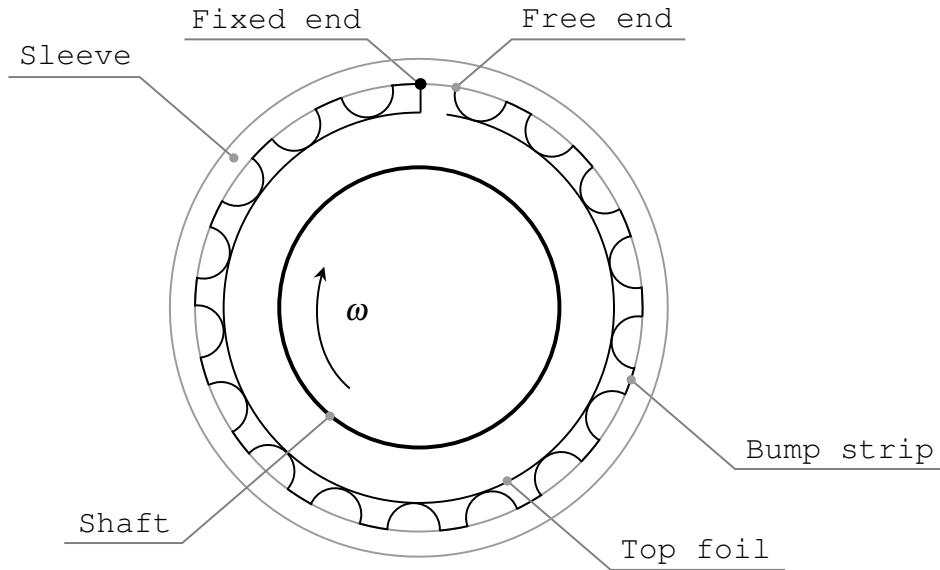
First generation bump-type foil bearing component nomenclature.
